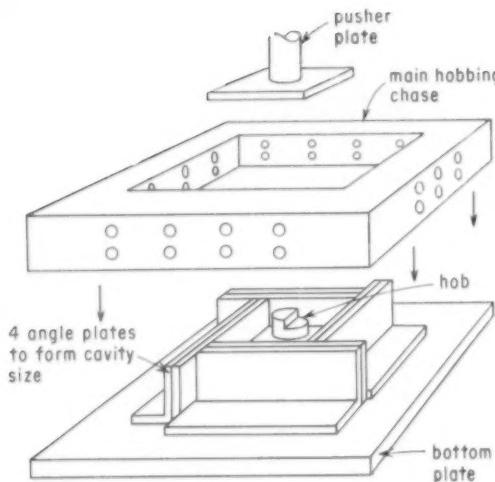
Hot hobbing assembly. After close clamps sides of hob to form sides of mold casting, pusher plate exerts pressure on molten beryllium, which is poured over the hob.
